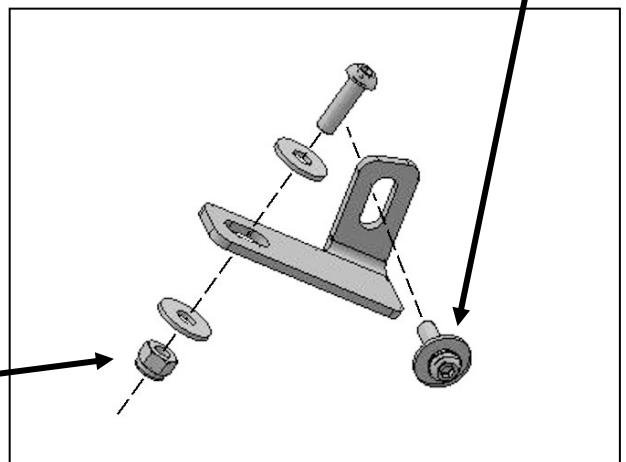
Attach air dam motor Relocation Bracket to front of crossmember. Insert Bracket between center support and crossmember (arrow)
